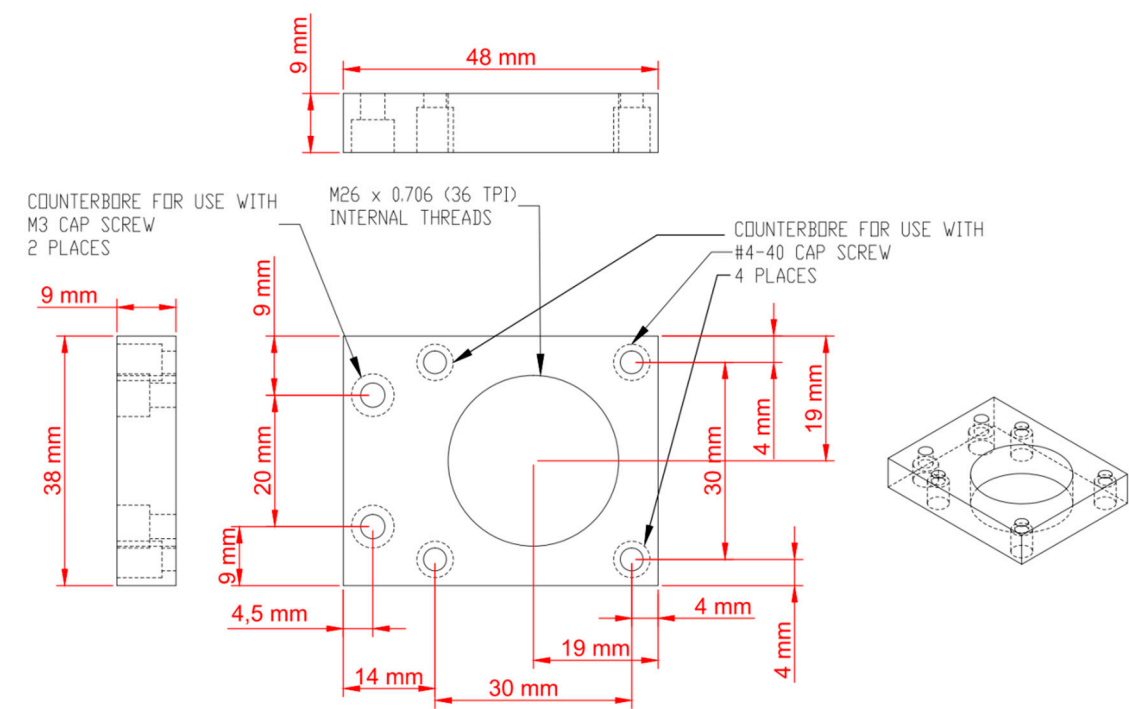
Detailed mechanical drawing of Part 3 from Figure S1.
